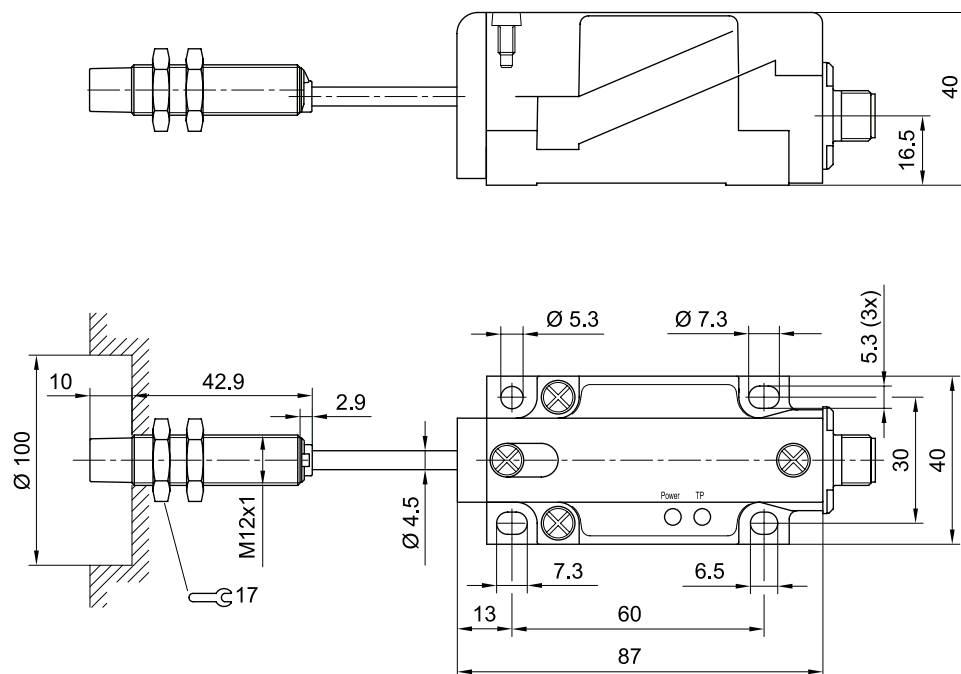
BIS L-400-043-003-02-S115 processor dimensions
